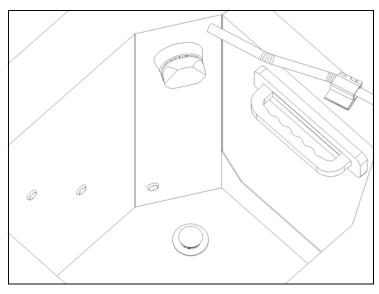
Drain Actuator And Main Drain Assembled In Bathtub
